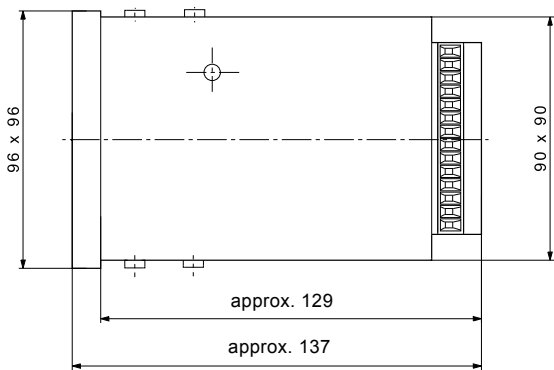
Dimensional sketch / mounting sketch for Conex® DIS-C for control-panel wall mounting
